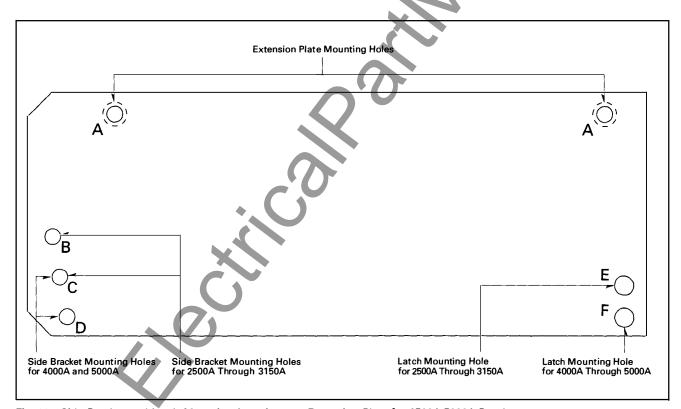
Side Bracket and Latch Mounting Locations on Extension Plate for 2500A-5000A Breakers
